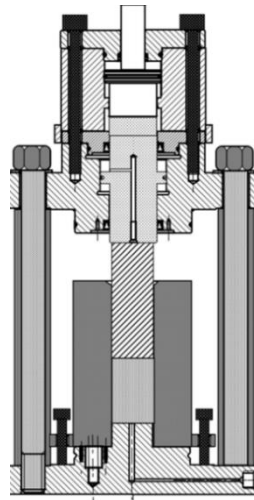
Schematic drawing of hydraulic pressure transmission consolidation device
